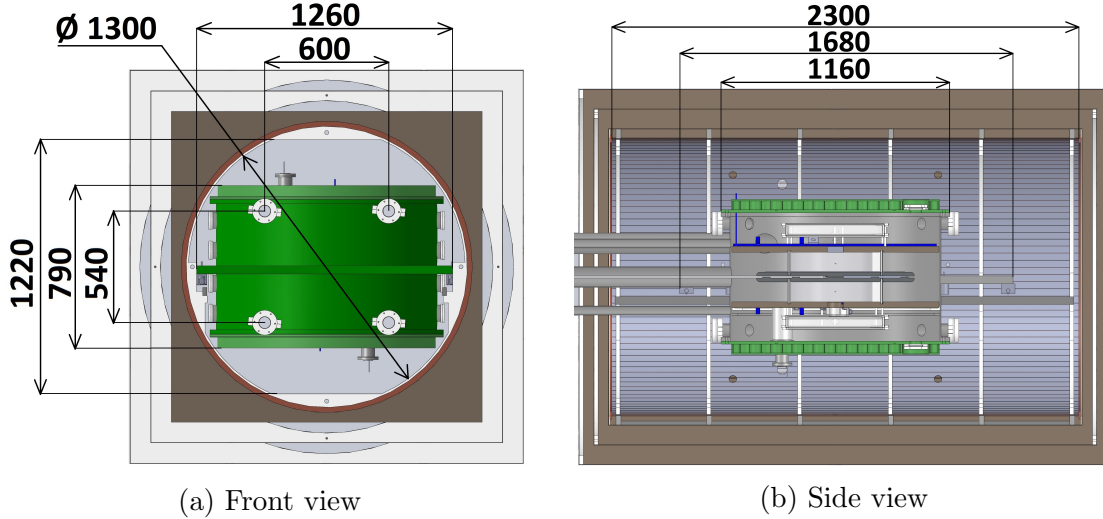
Vacuum vessel and the inner passive shield with dimensions (in mm).
